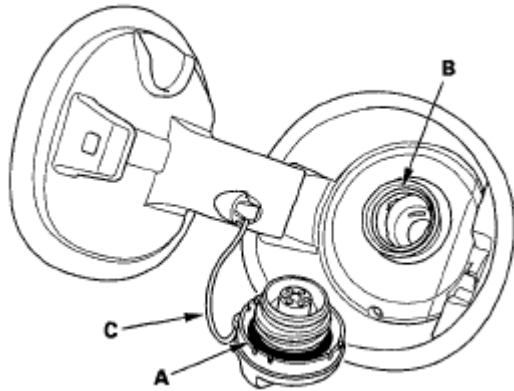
Identifying Fuel Fill Cap Seal And Fuel Fill Pipe Mating Surface
